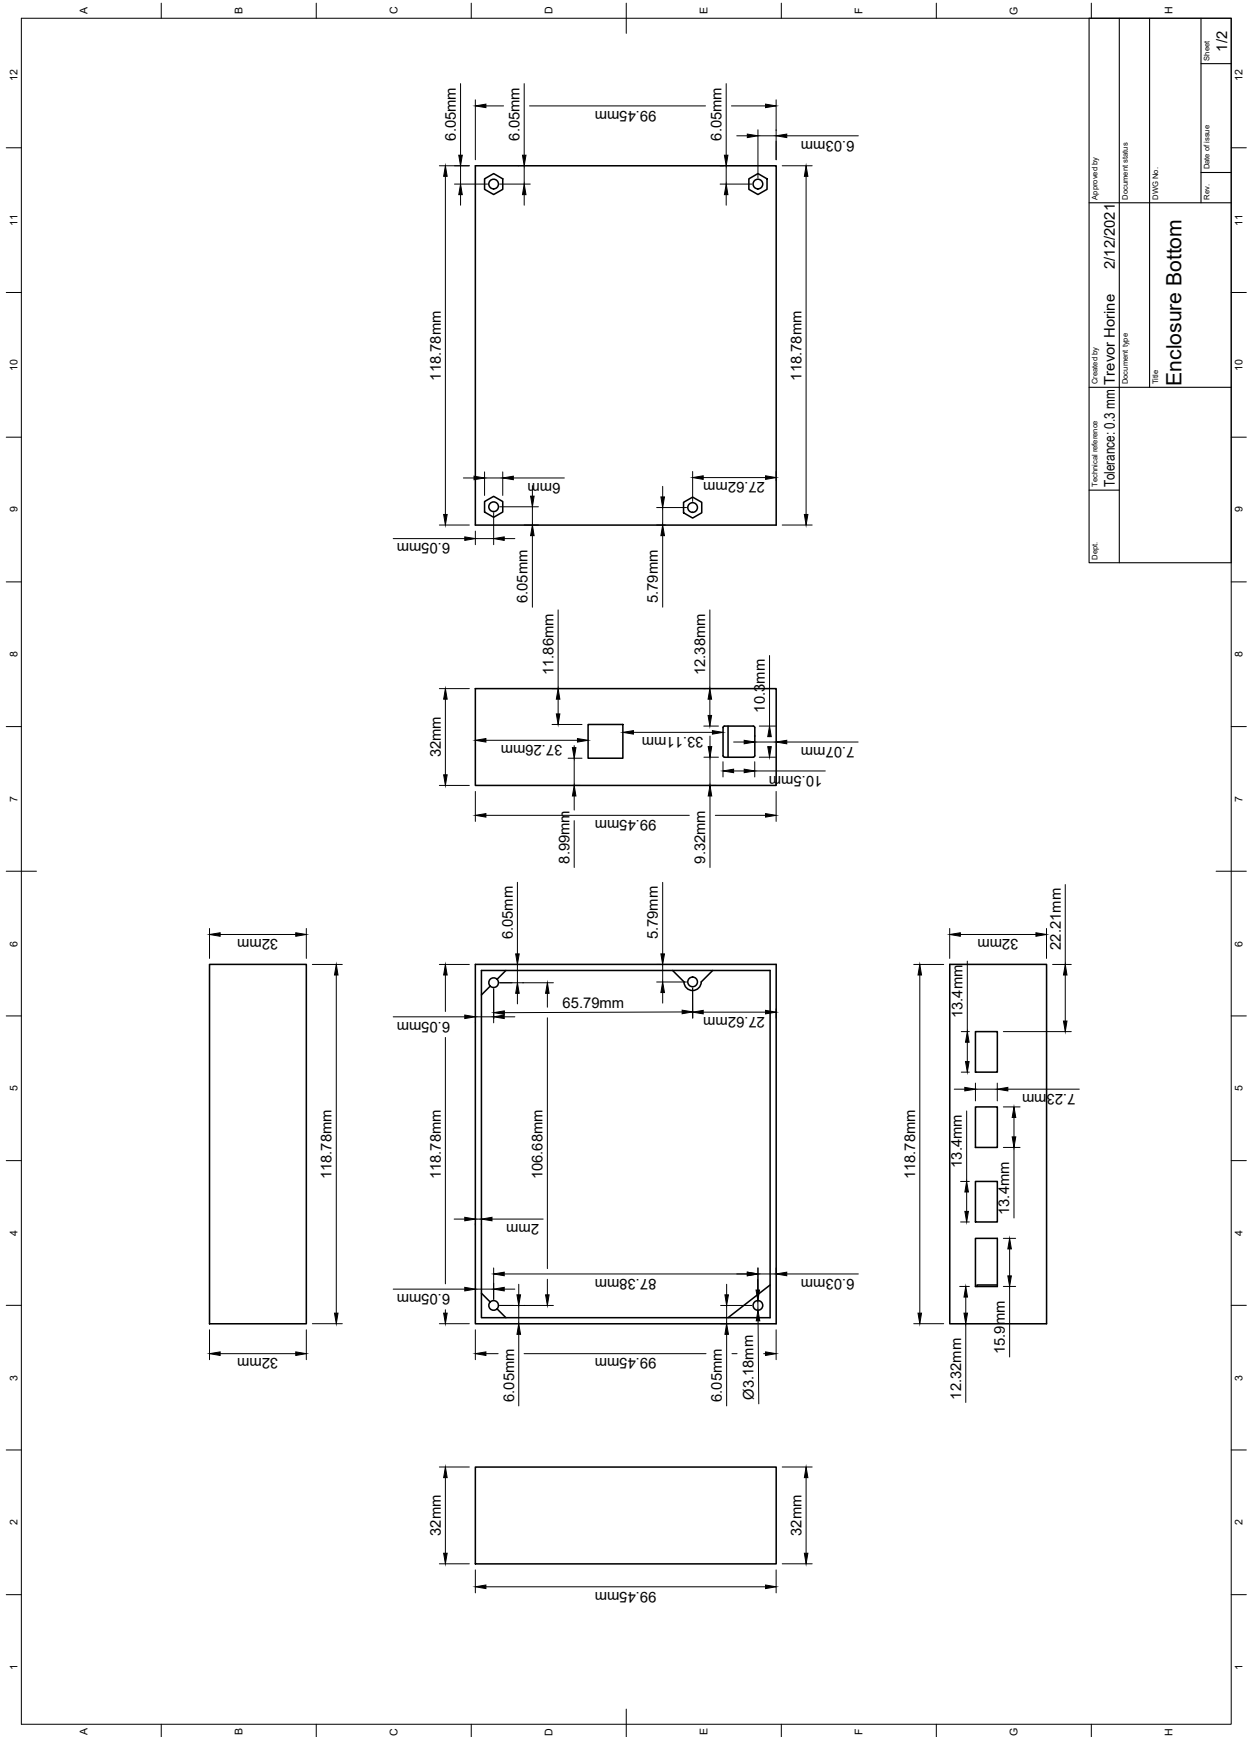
Mechanical drawing of the bottom half of the enclosure designed to hold the PCB.
